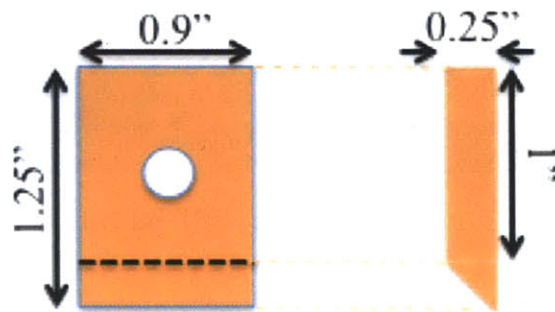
Layout of Cu-blocks used to mount heaters in PBF
